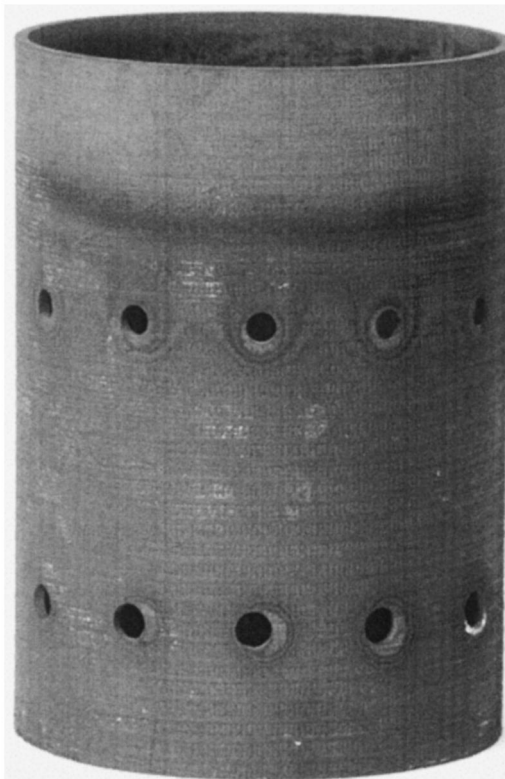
SiC/SiC flame tube after 50 h of engine operation
